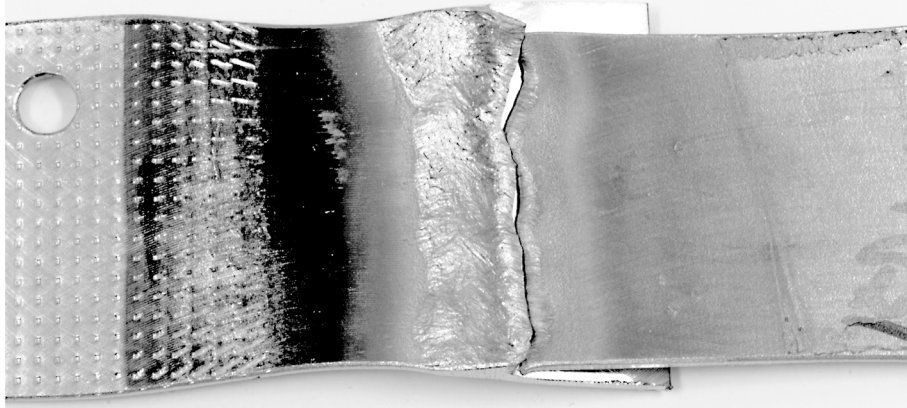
shows a butt weld joint on Al 5456, a configuration which included some of the most defective joints tested. This fracture revealed large voids, porosity, and lack of fusion.
